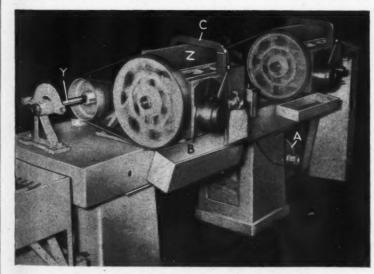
Equipment for testing and running-in Dialmatic feed gearboxes before they are fitted to IMOR lathes
